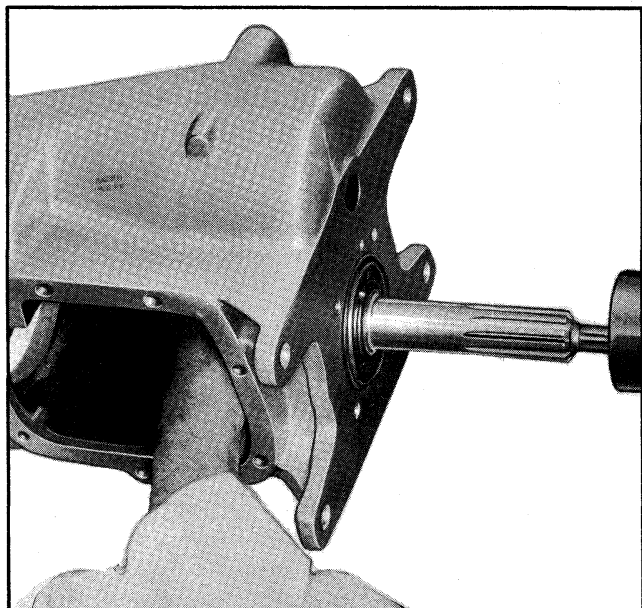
A-18 Removing Main Drive Gear from Front Bearing
